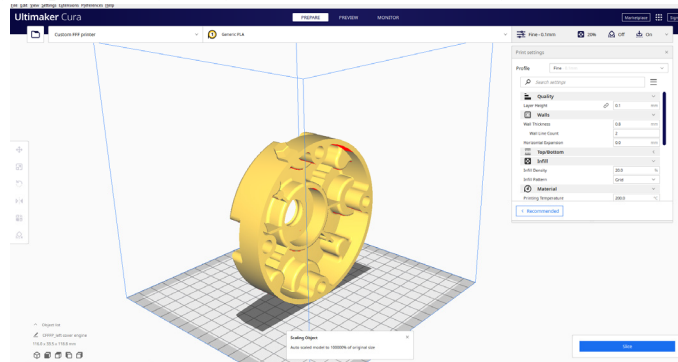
Sample processing steps in the preparation of 3D Print – engine cover
